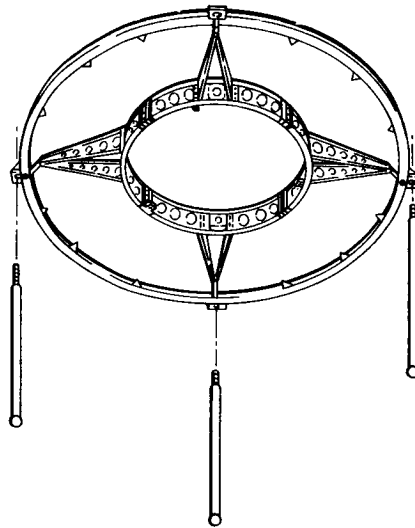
Planetary Vehicle/Nose Fairing Mating and Assembly Fixture
